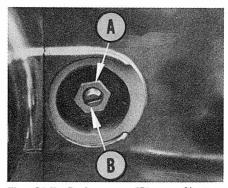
Back screw (B) our 1/2 turn after it seats lightly and tighten lock nut (A). Adjust clutch control cable for proper free play.
